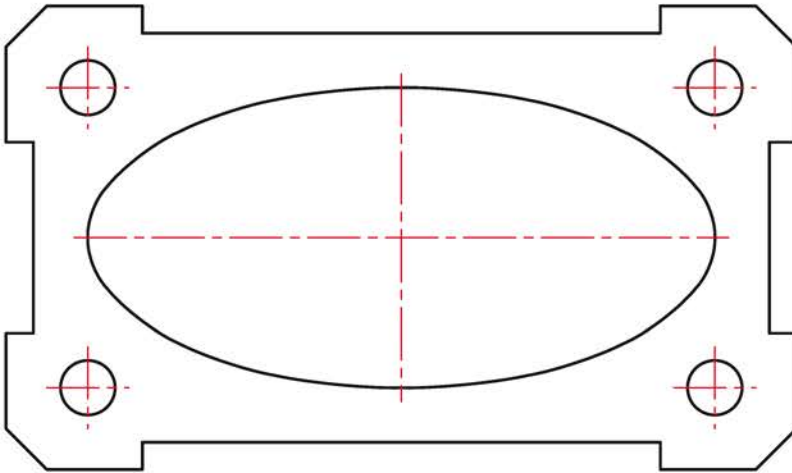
Drawing to be acted upon by the Zoom tool
